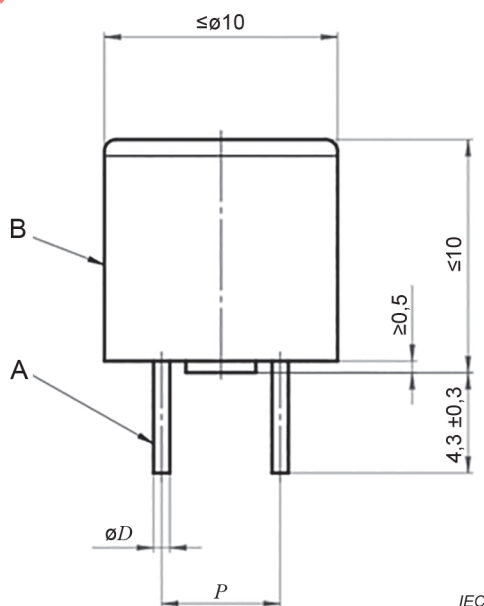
Outline of gauges and dummy fuse-links according to IEC 60127-3:2015, standard sheets 3 and 4
